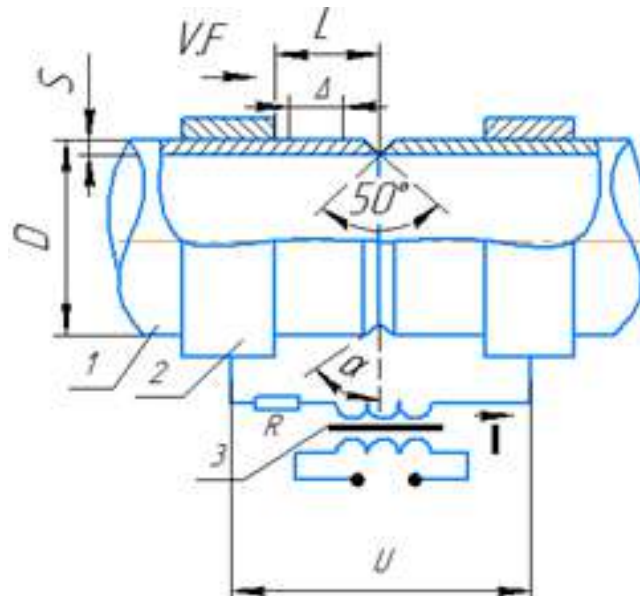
Scheme of the flash welding process. 1 - weldable structure, 2 - clamps, 3 - welding transformer
